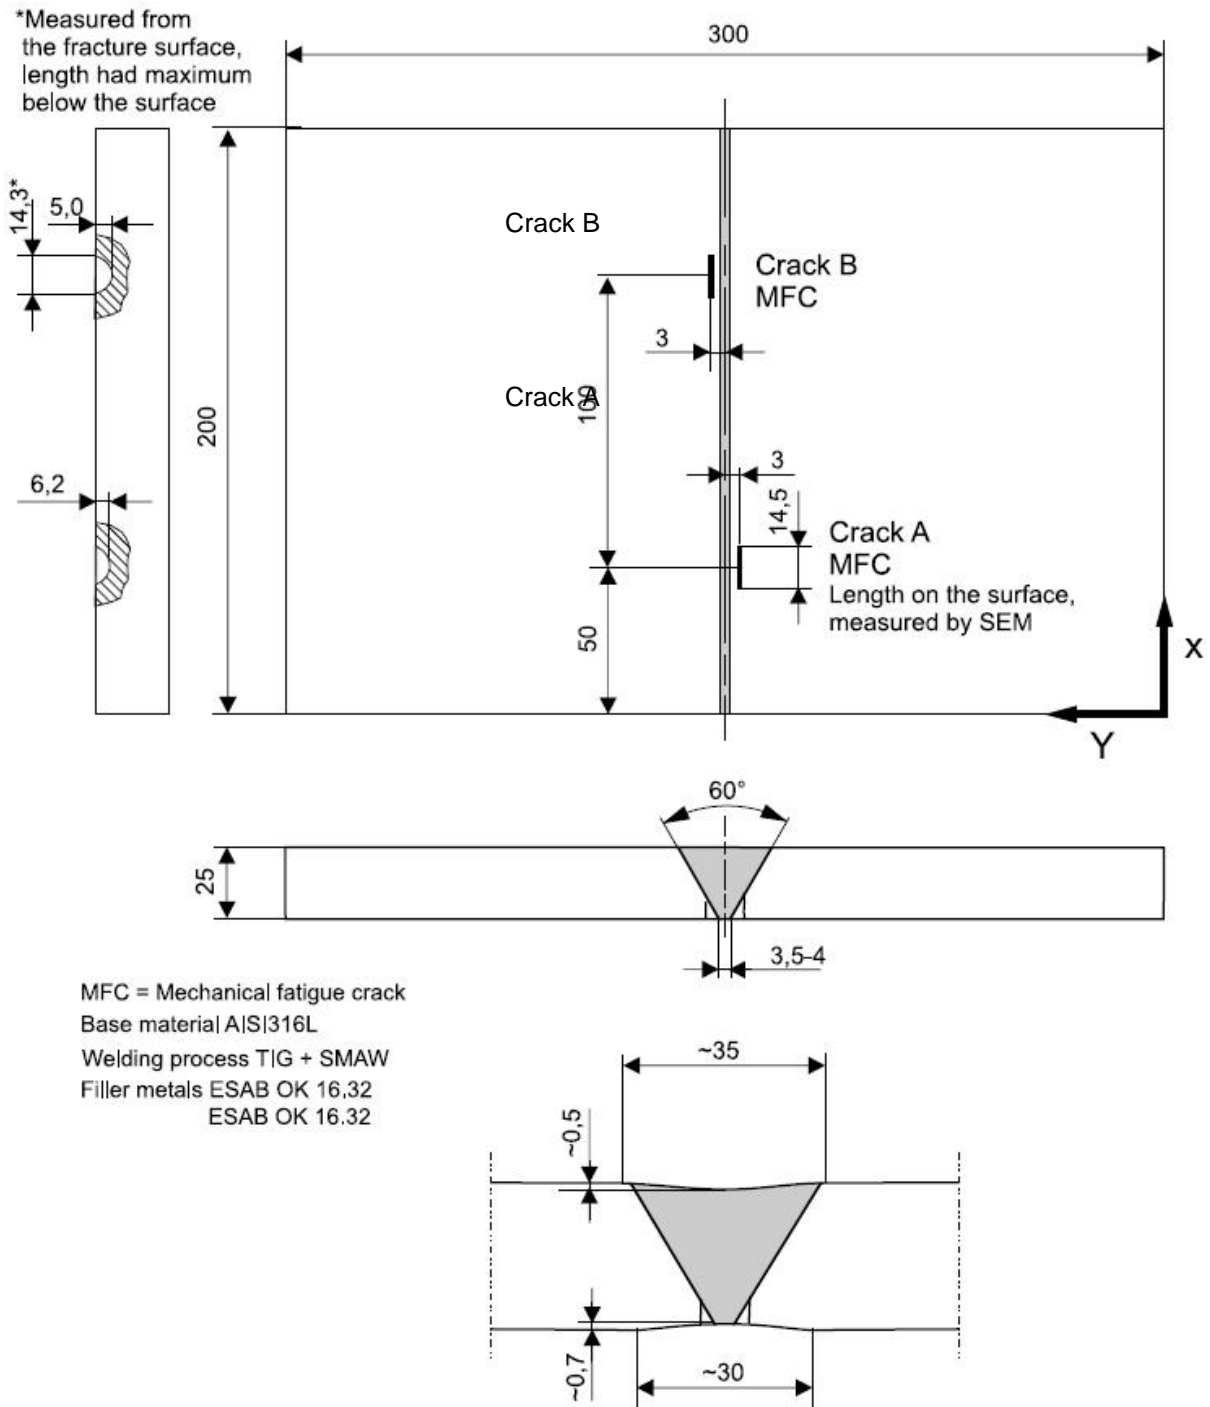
Drawing of MF test piece and location of fabricated MF cracks.
